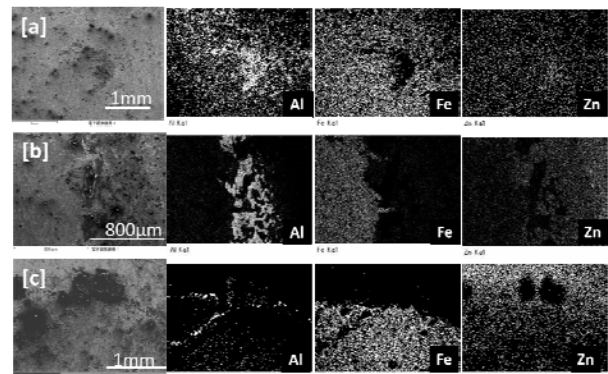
EDS analysis of the fatigue fracture surface: (a) Center, (b) edge, and (c) secondary crack of joint in Fig. 12, respectively.
